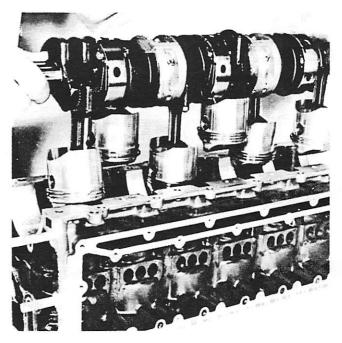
Removing (and Installing) Crankshaft Ass'y from Cylinder Block
